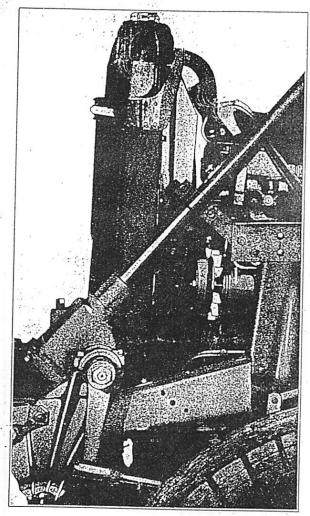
Cab-Over-Engine Steering Gear Mounting
